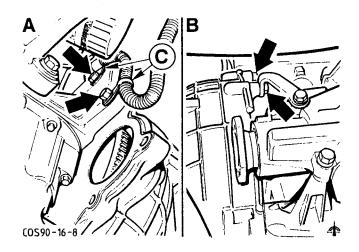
Cylinder block flange bolts in transmission housing. (Sierra shown)
